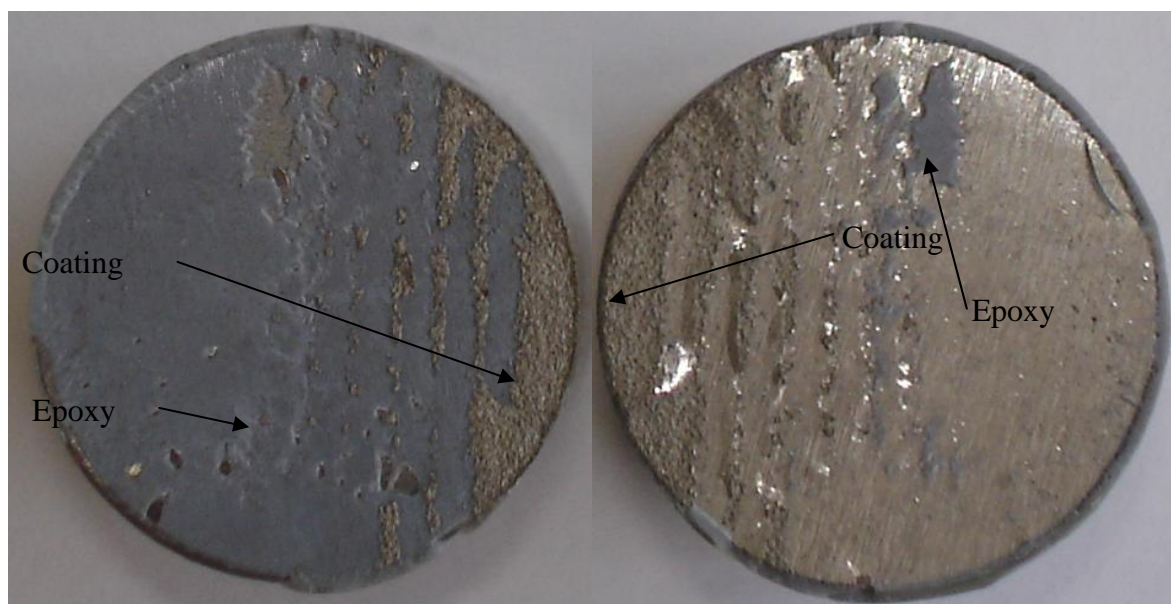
Top view of Ni-20 wt. % Ni coated BN (103 μm) coating surface after fracture showing cohesive failure within the coating
